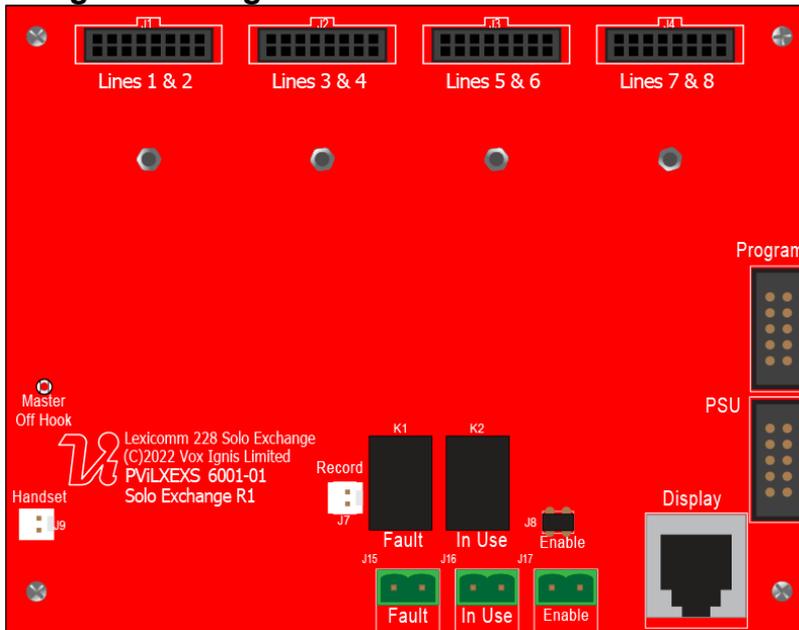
Lexicomm Solo Exchange PCB Diagram
